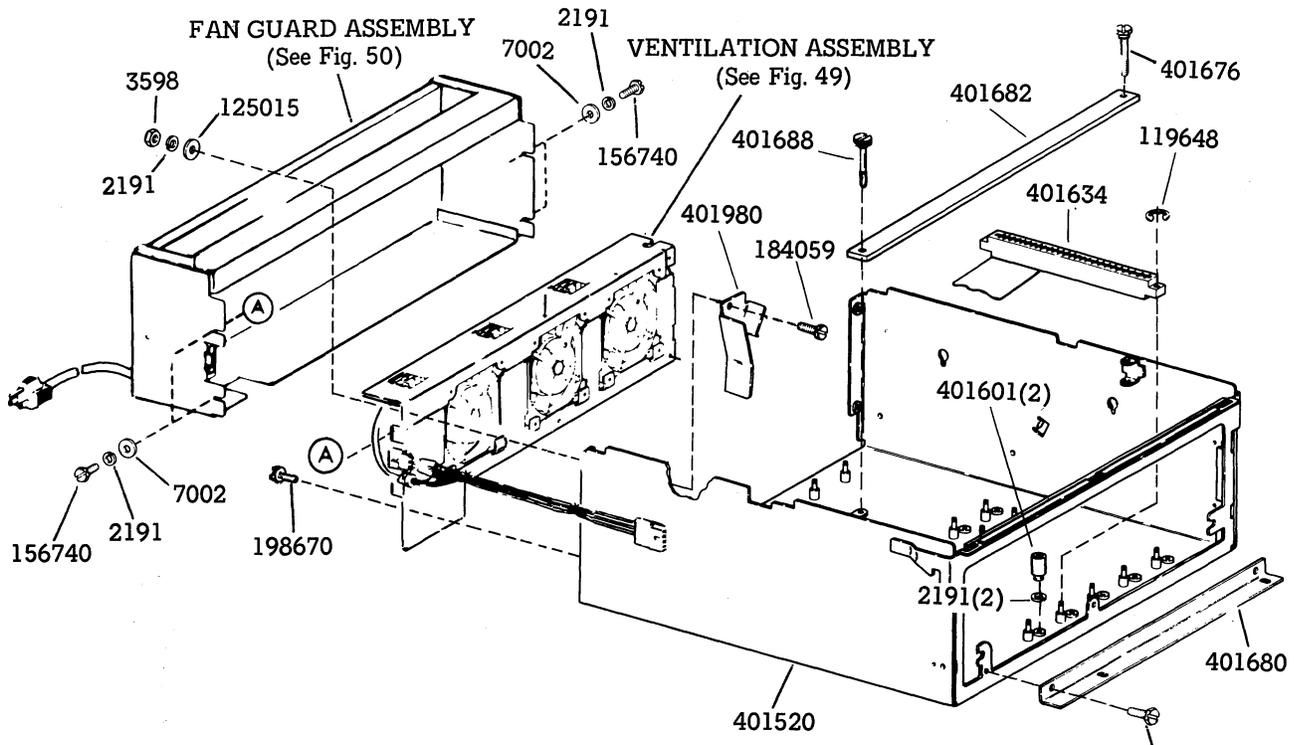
407378 RO Module Assembly for 40CAB901/AF Cabinet
